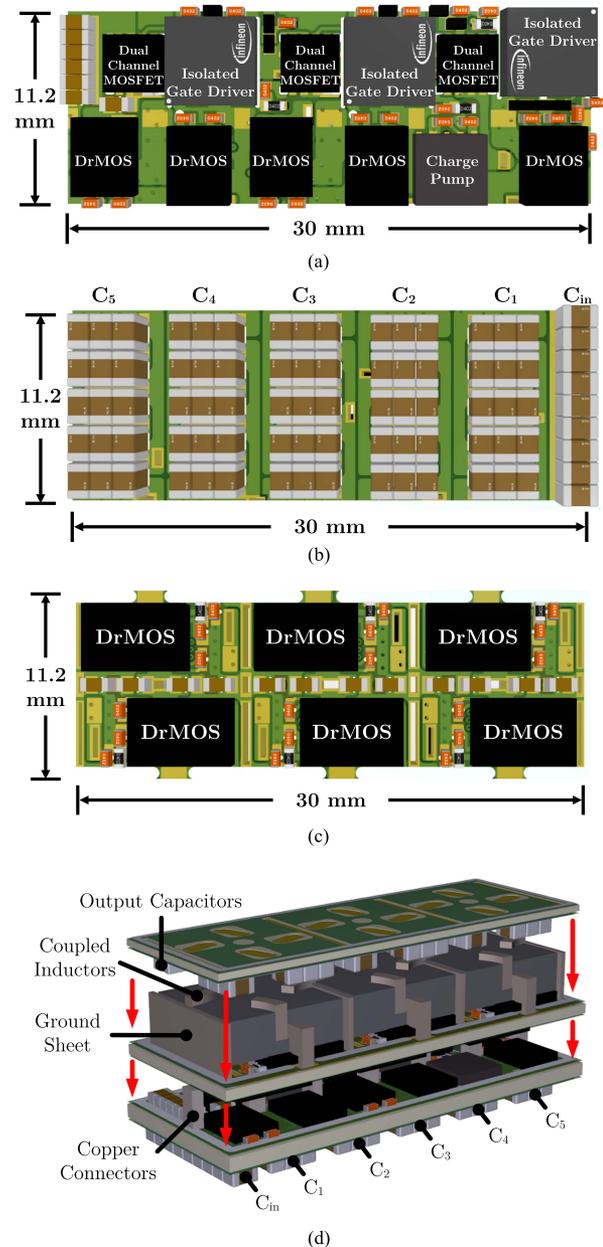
(a) PCB layout of the top side of the SC stage. The power stage and all gate-drive circuitry is included within an area of 336 mm^2 . (b) PCB layout of the bottom side of the SC stage, containing the flying capacitors and input capacitors. (c) PCB layout of the top side of the multiphase buck board. The bottom side has identical component placement. Four pads are present on the top side to connect to the four-phase coupled inductor. (d) Altium 3-D rendering of multiboard assembly process.
